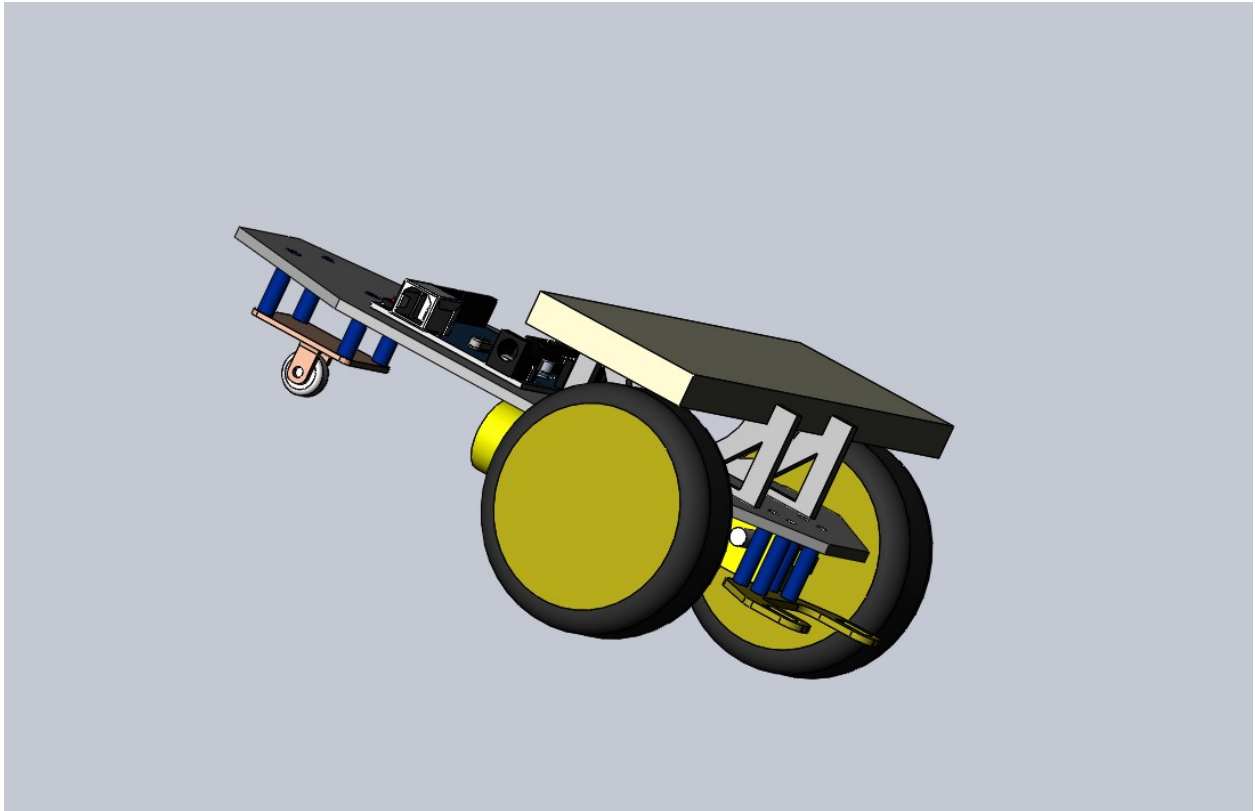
3D render of custom baseplate assembled with motors, wheels, caster, and breadboard.
